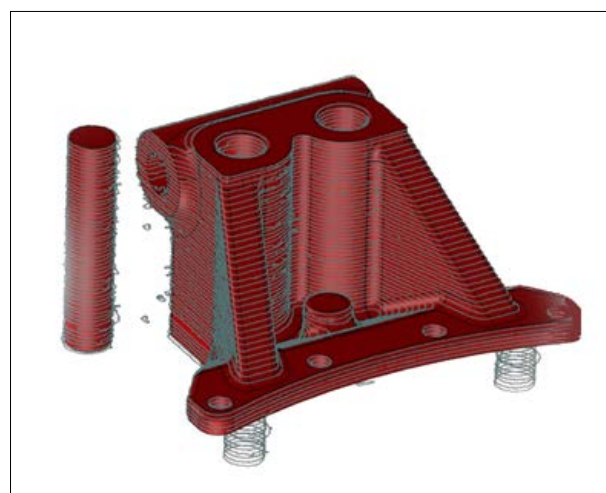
Example of Actual In-Situ Geometric Data superimposed on Part CAD Model. [CAD model courtesy Honeywell Aerospace]
